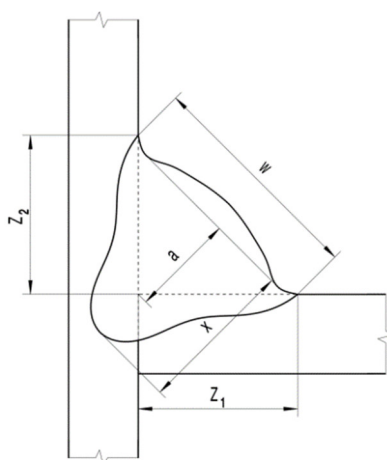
Schematic illustration of the geometrically evaluated quantities of weld.
